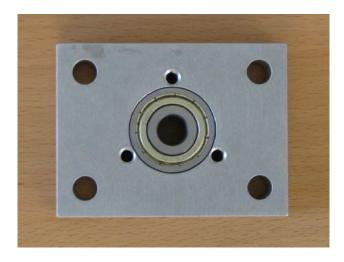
DCNC Bearing Block with mounted bearing, used at motor end of the spindle
